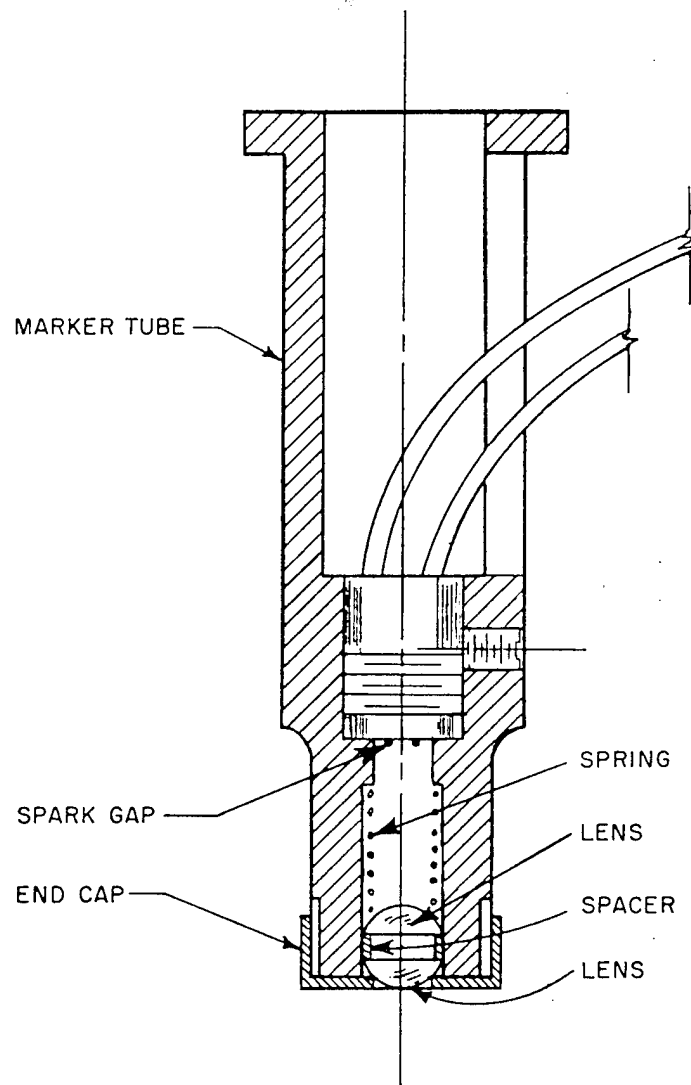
Cross-sectional Diagrammatic Sketch of Marker Light Assembly
